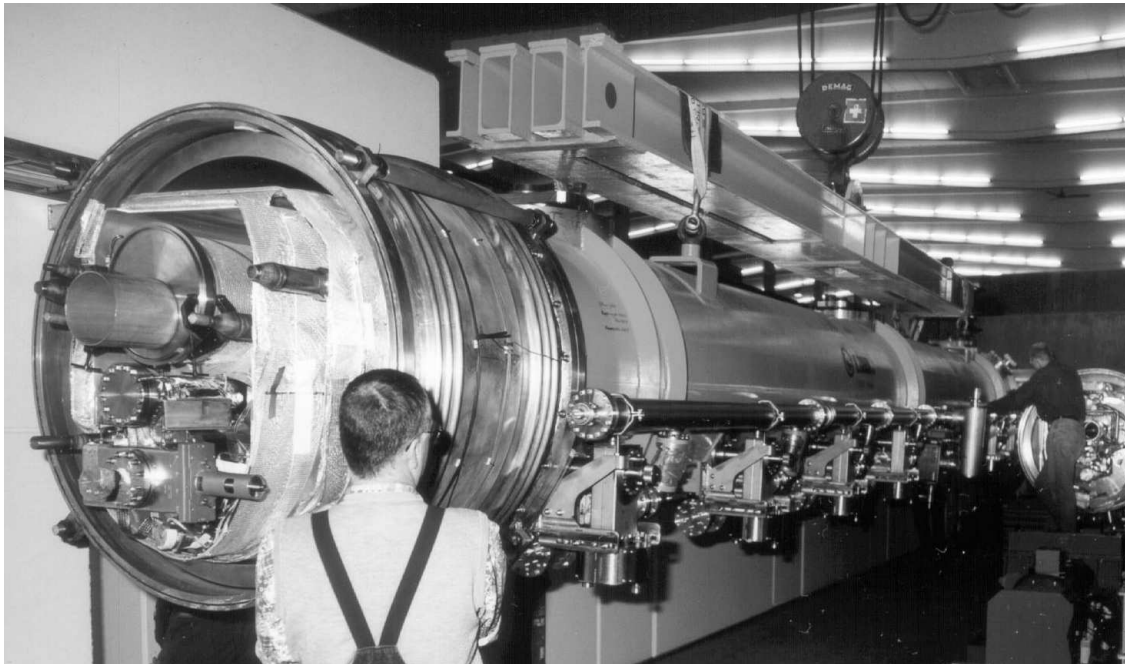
Assembly of a cryomodule at TTF2, DESY
